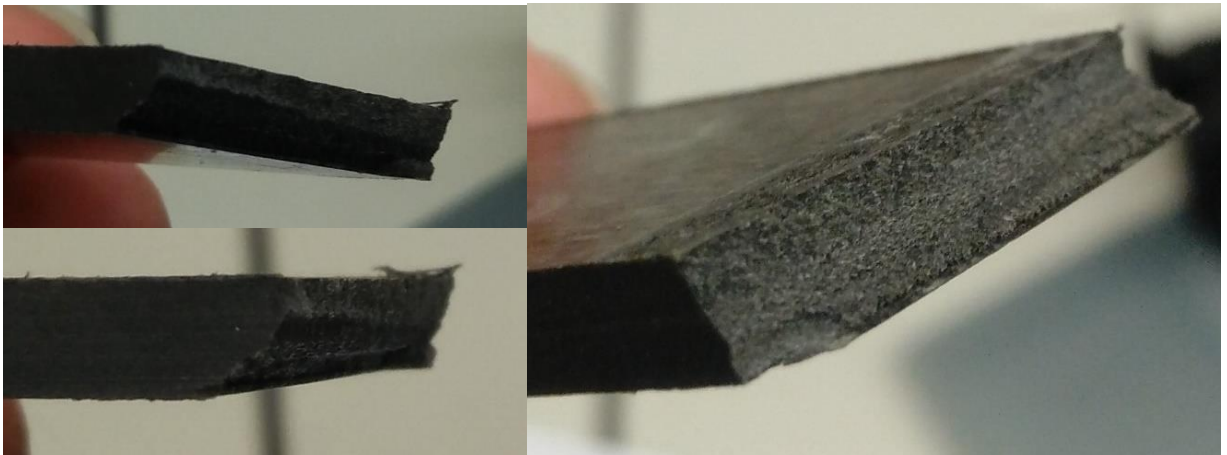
Fracture of lowest load specimen, S11, from the advancing side (left) and the retreating side (right).
